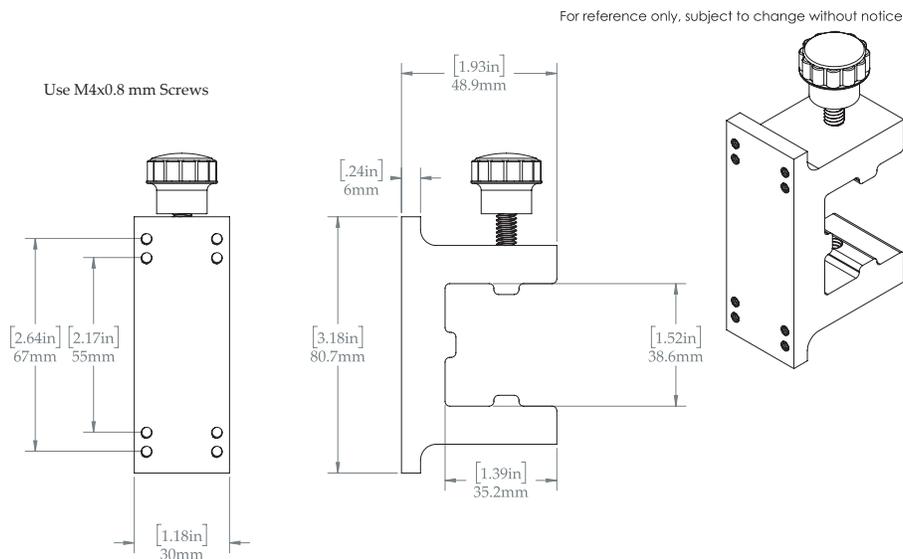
1.5" Sensor Mounting Bracket for use with 1.5" extrusion
